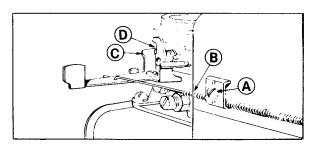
THROTTLE CONTROL ADJUSTMENT CARBURETOR ADJUSTMENTS
